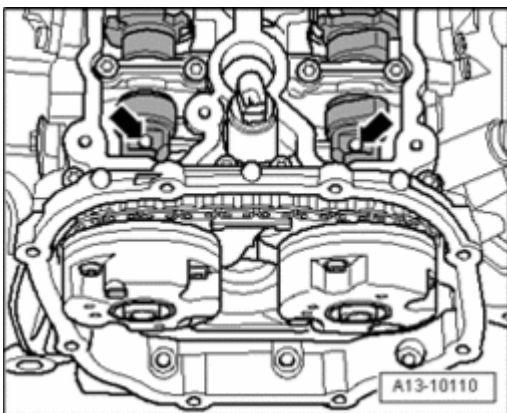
Identifying Threaded Holes In Camshafts Must Face Upward
